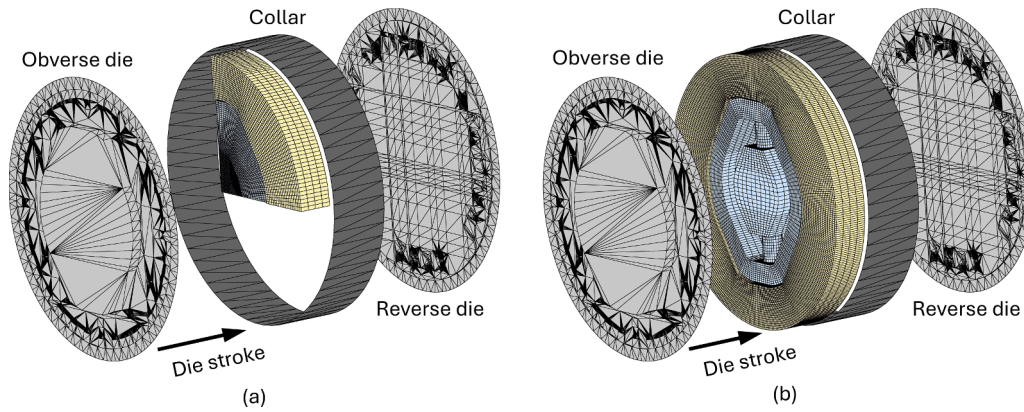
Finite element models of bi-material collector coins with inner elements: (a) without and (b) with free-rotating movement.
